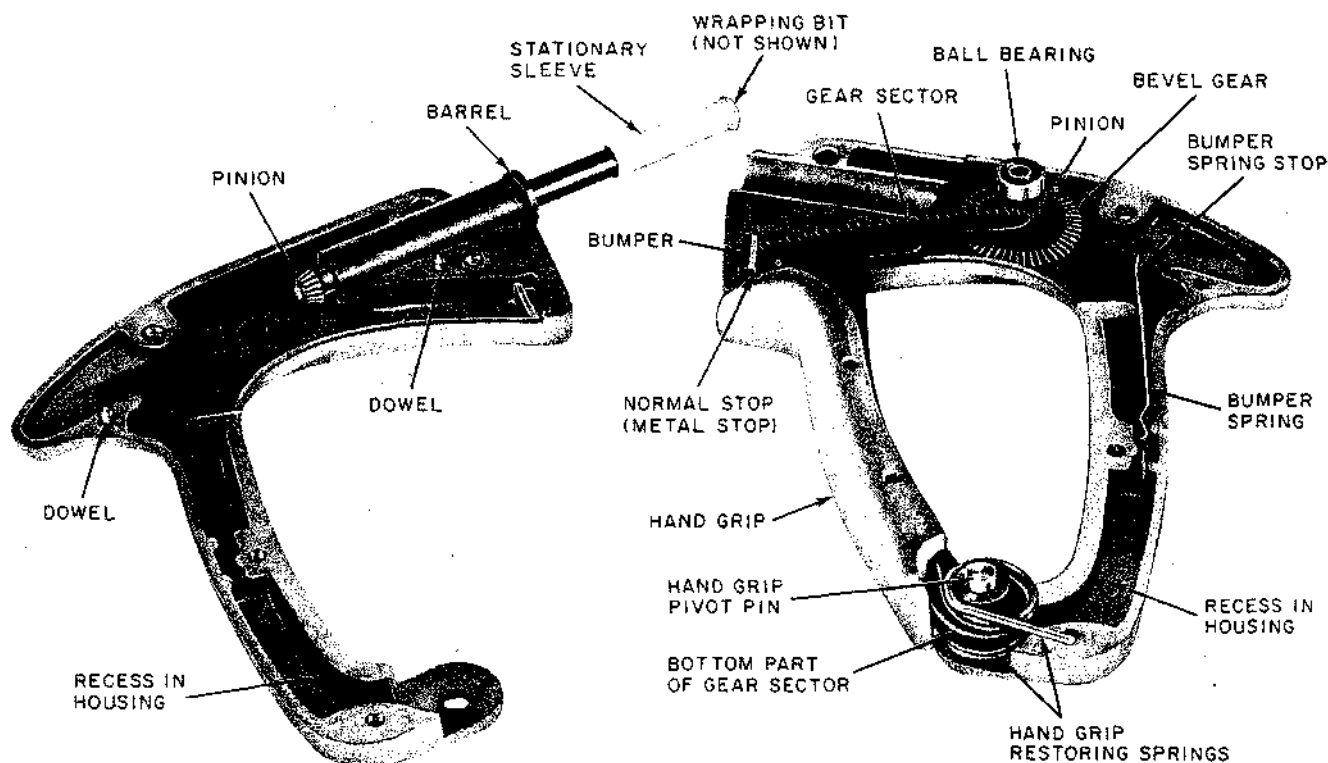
KS-16363 L1 Hand Wire-Wrapping Tool—Interior View
